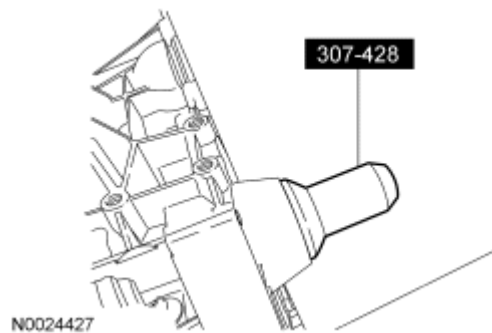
Installing RH Differential Seal Using Special Tools (1 Of 2)
